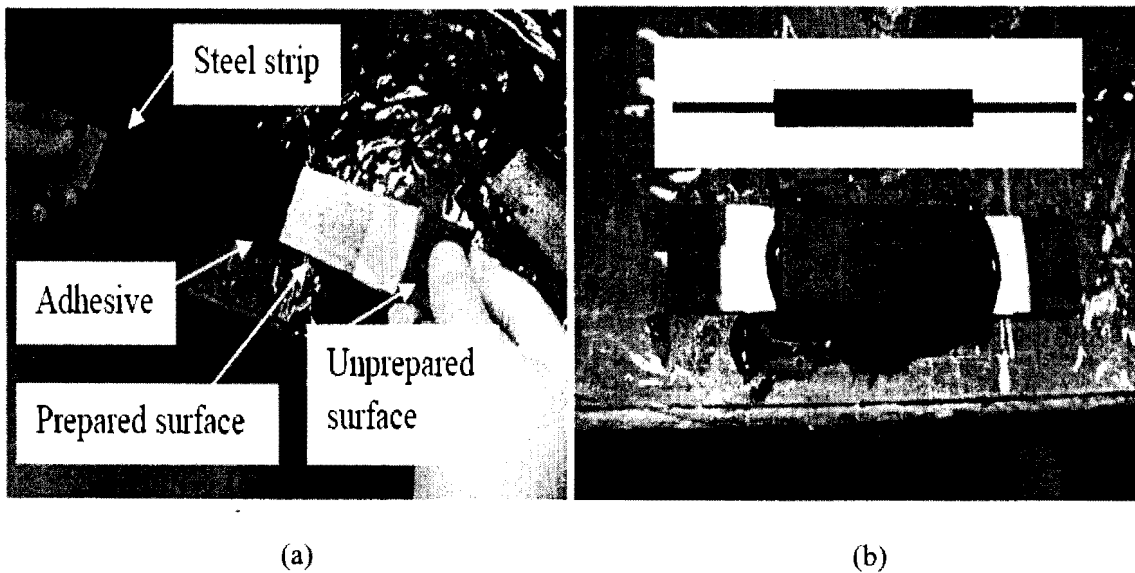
Test specimens: (a) Bonding steel strips; (b) Assembled specimen
